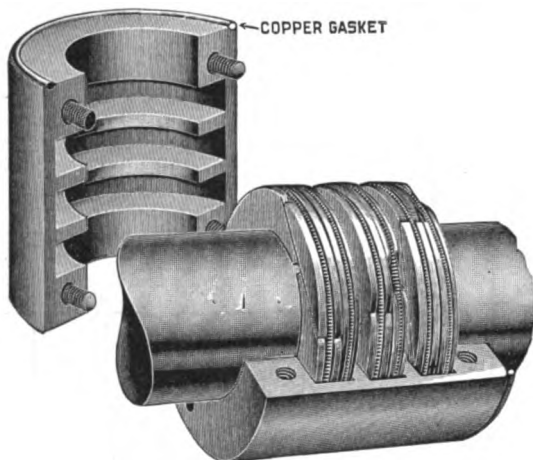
PACKING CAGE (INSIDE SPLIT)
